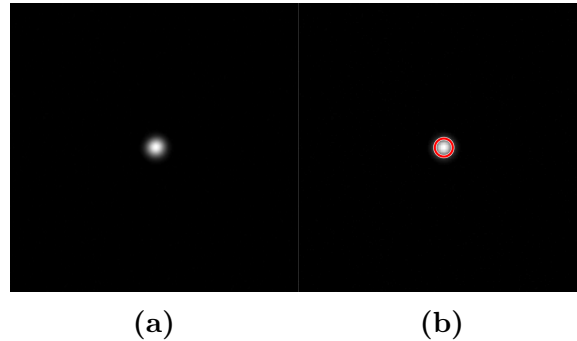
Example circular hough transform performed on UT C-scan of a #2 Flat Bottom Hole Standard
